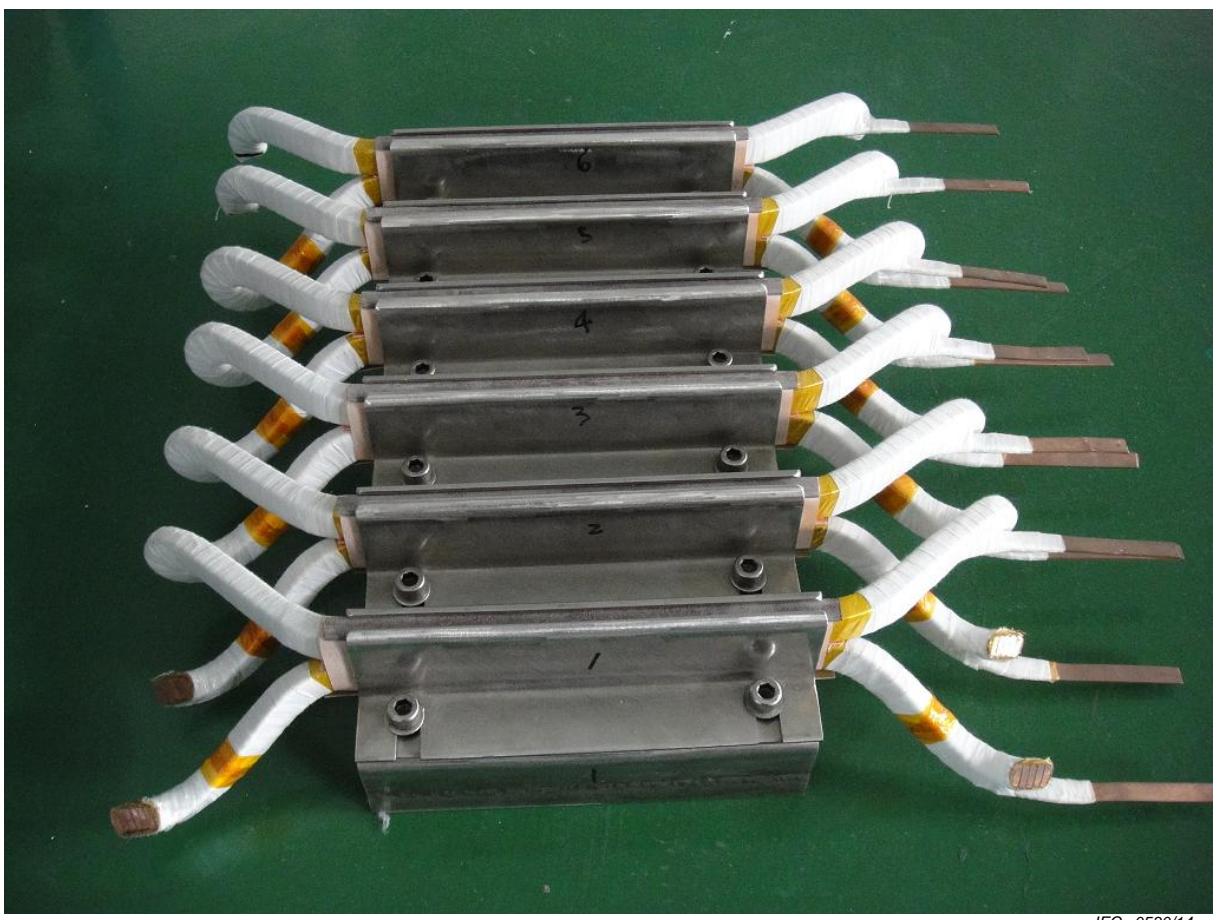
Formed coils placed into the form-wound test specimen or Formette
